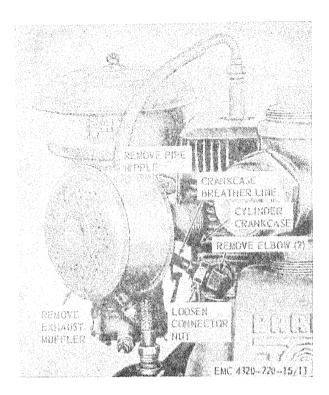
Exhaust muffler and crankcase breather line, removal and installation.
